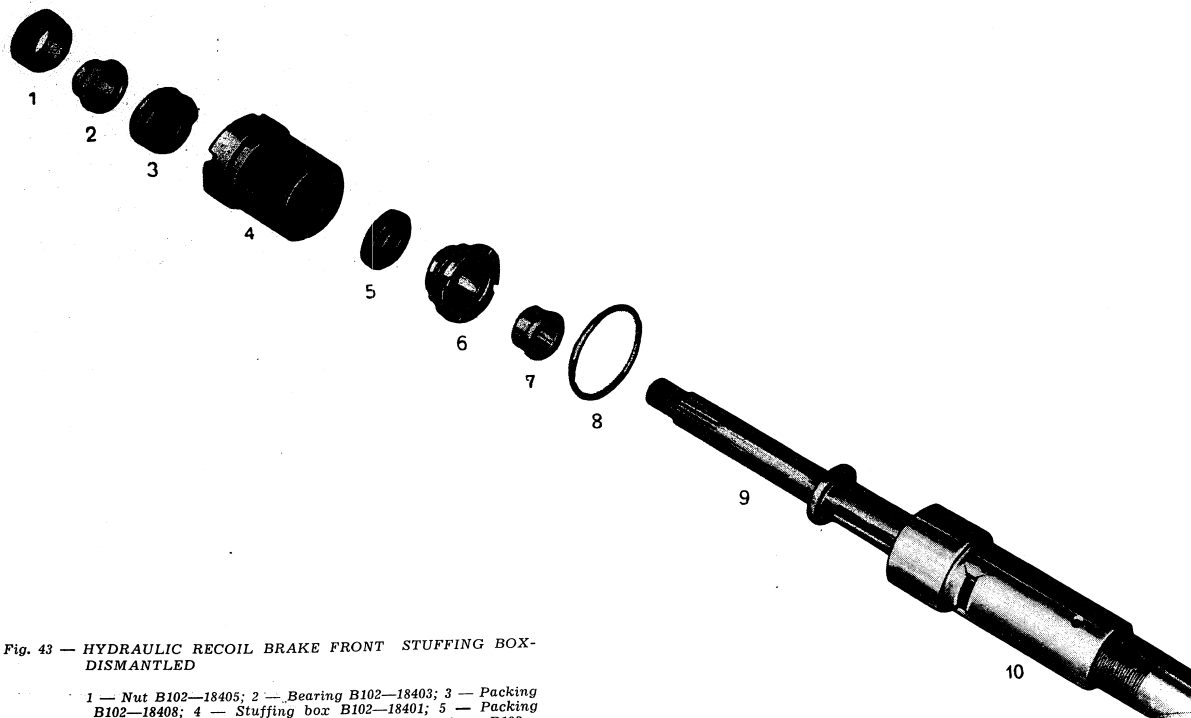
HYDRAULIC RECOIL BRAKE FRONT STUFFING BOX-DISMANTLED
